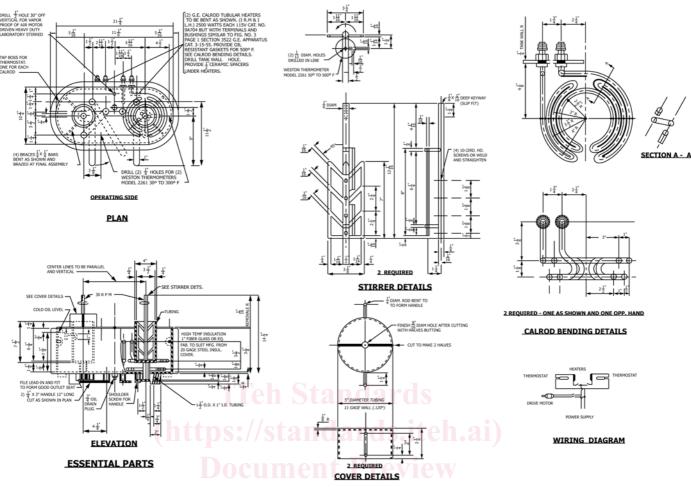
Detailed Drawing of Joint Sealant Laboratory Melting Unit
